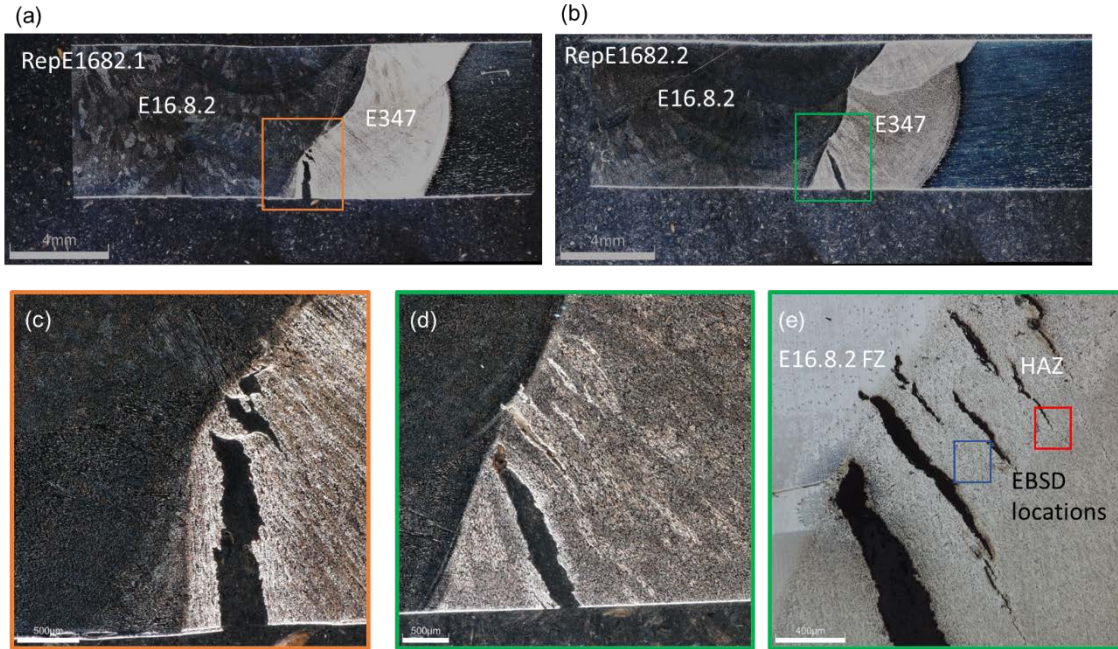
Cracks developed during cooling step in old E347 filler in repair welds using E16.8.2. (a) Rep E1682.1 (800°C), (b) Rep 1682.2 (850°C), (c) closer mag of cracks in Rep E1682.1 (800°C), (d) closer mag of cracks in Rep E1682.2 (850°C), and (e) LOM of same location with indication of EBSD locations within the original E347 filler (repair HAZ)
